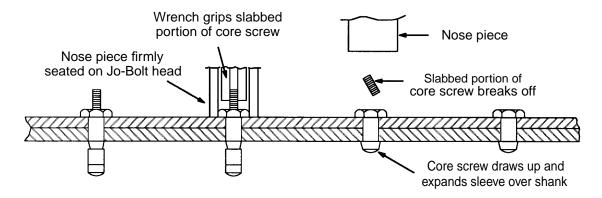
Jo-Bolt Installation using Pneumatic Pistol Installation Tool
